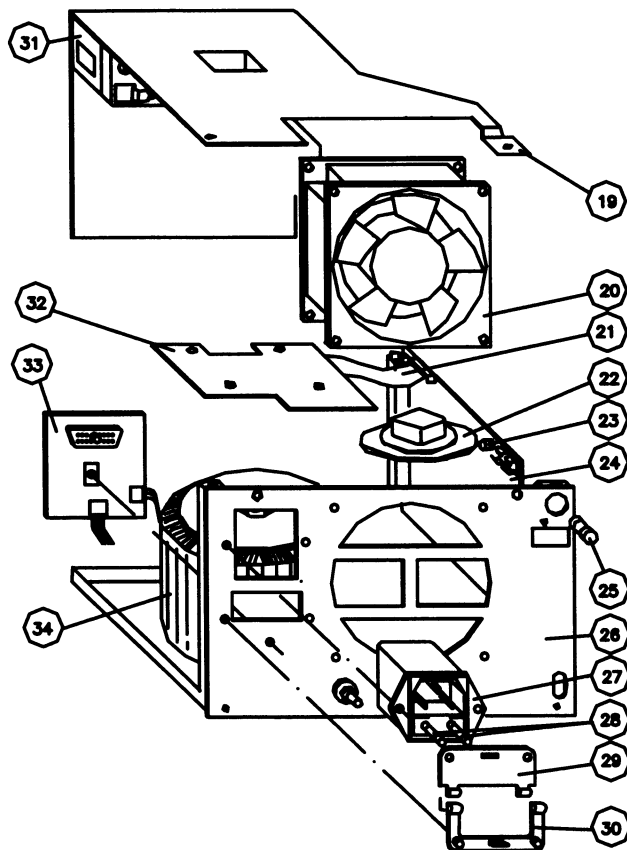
Exploded view of the Power Supply Unit, F-CU8 (rev.10)
